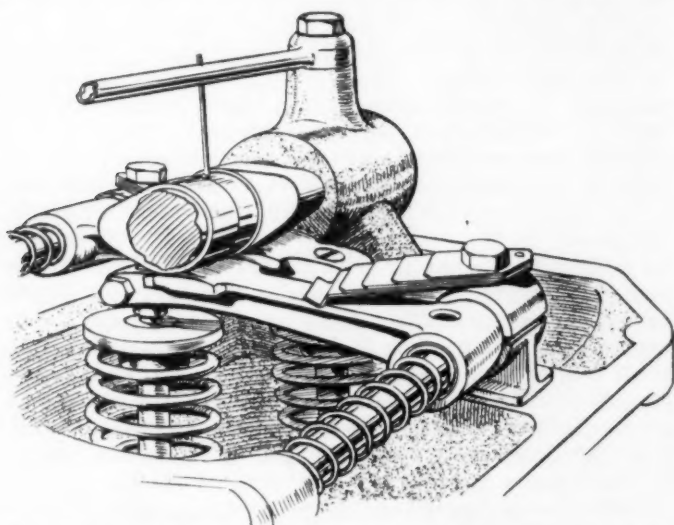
THE BEARDMORE ENGINE THAT EMPLOYS PIVOTED LEVERS WITH AN OFFSET CAMSHAFT TO OPERATE THE VALVES
